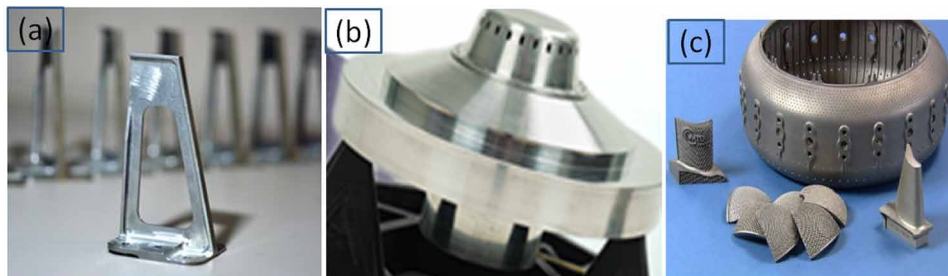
(c) showing the MTU aero engine. NASA already declared the achievement of an important milestone by manufacturing the whole 3D-printed rocket engine. NASA’s largely 3D printed rocket engine prototype successfully tested a series of 12 test firings at NASA’s Marshall Space Flight Centre in Huntsville, Alabama. The fuel injector, fuel turbopump, valves and many major components of the engine were all 3D printed. But the project of creating a fully printed 3D engine was not completed, and the main combustion chamber is the main obstacle. In the 2015, NASA developed an engine prototype 75 percent of which was made with 3D printed parts with the first full-scale copper rocket engine part (“NASA 3-D Prints First Full-Scale Copper Rocket Engine Part | NASA,” n.d.; “NASA develops first 3-D printed copper rocket engine part - The Economic Times,” n.d.). During the test, the combustion chamber was eroded within 10 second firing time, results the increase in internal pressures of the
